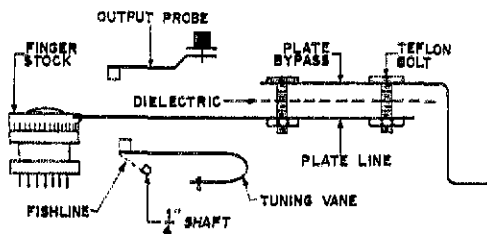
Assembly detail showing the relative positions of the various parts of the plate line and tuning arrangement.
